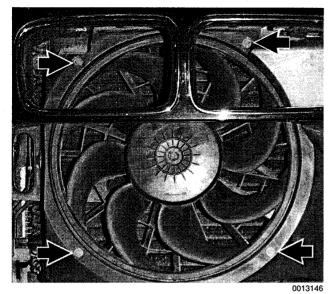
Version 2 auxiliary fan mounting screws (arrows). Front bumper has been removed.
